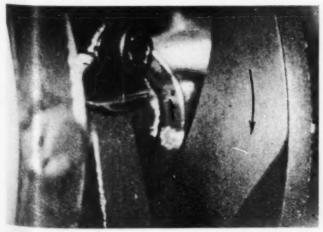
Perforator pilot pins engaging perforated holes using redesigned shuttle cam
